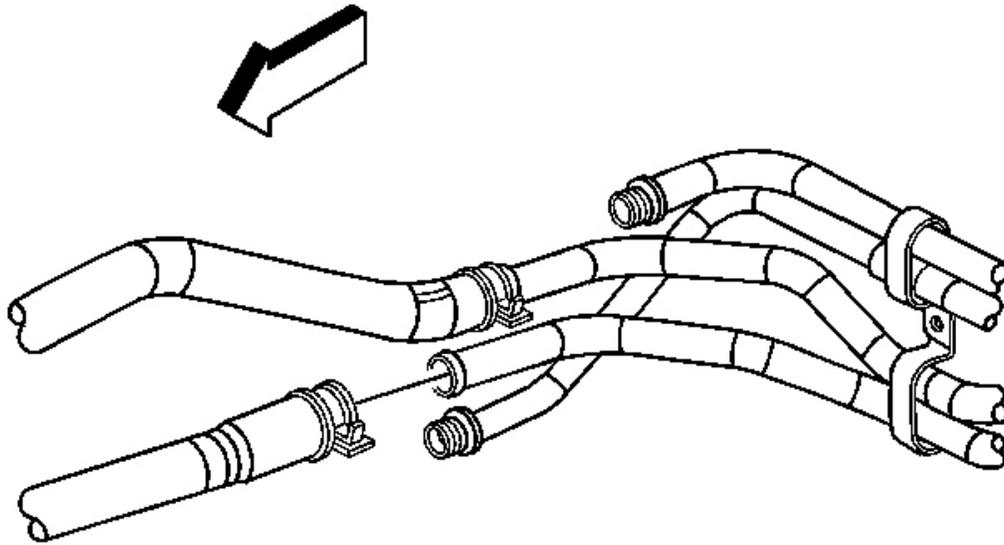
Heater Inlet Hose Clamp At Heater Pipe Assembly
